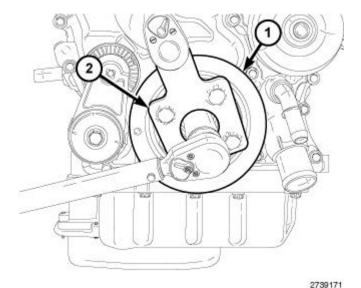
Crankshaft Vibration Damper & Vibration Damper Holder Courtesy of CHRYSLER GROUP, LLC
